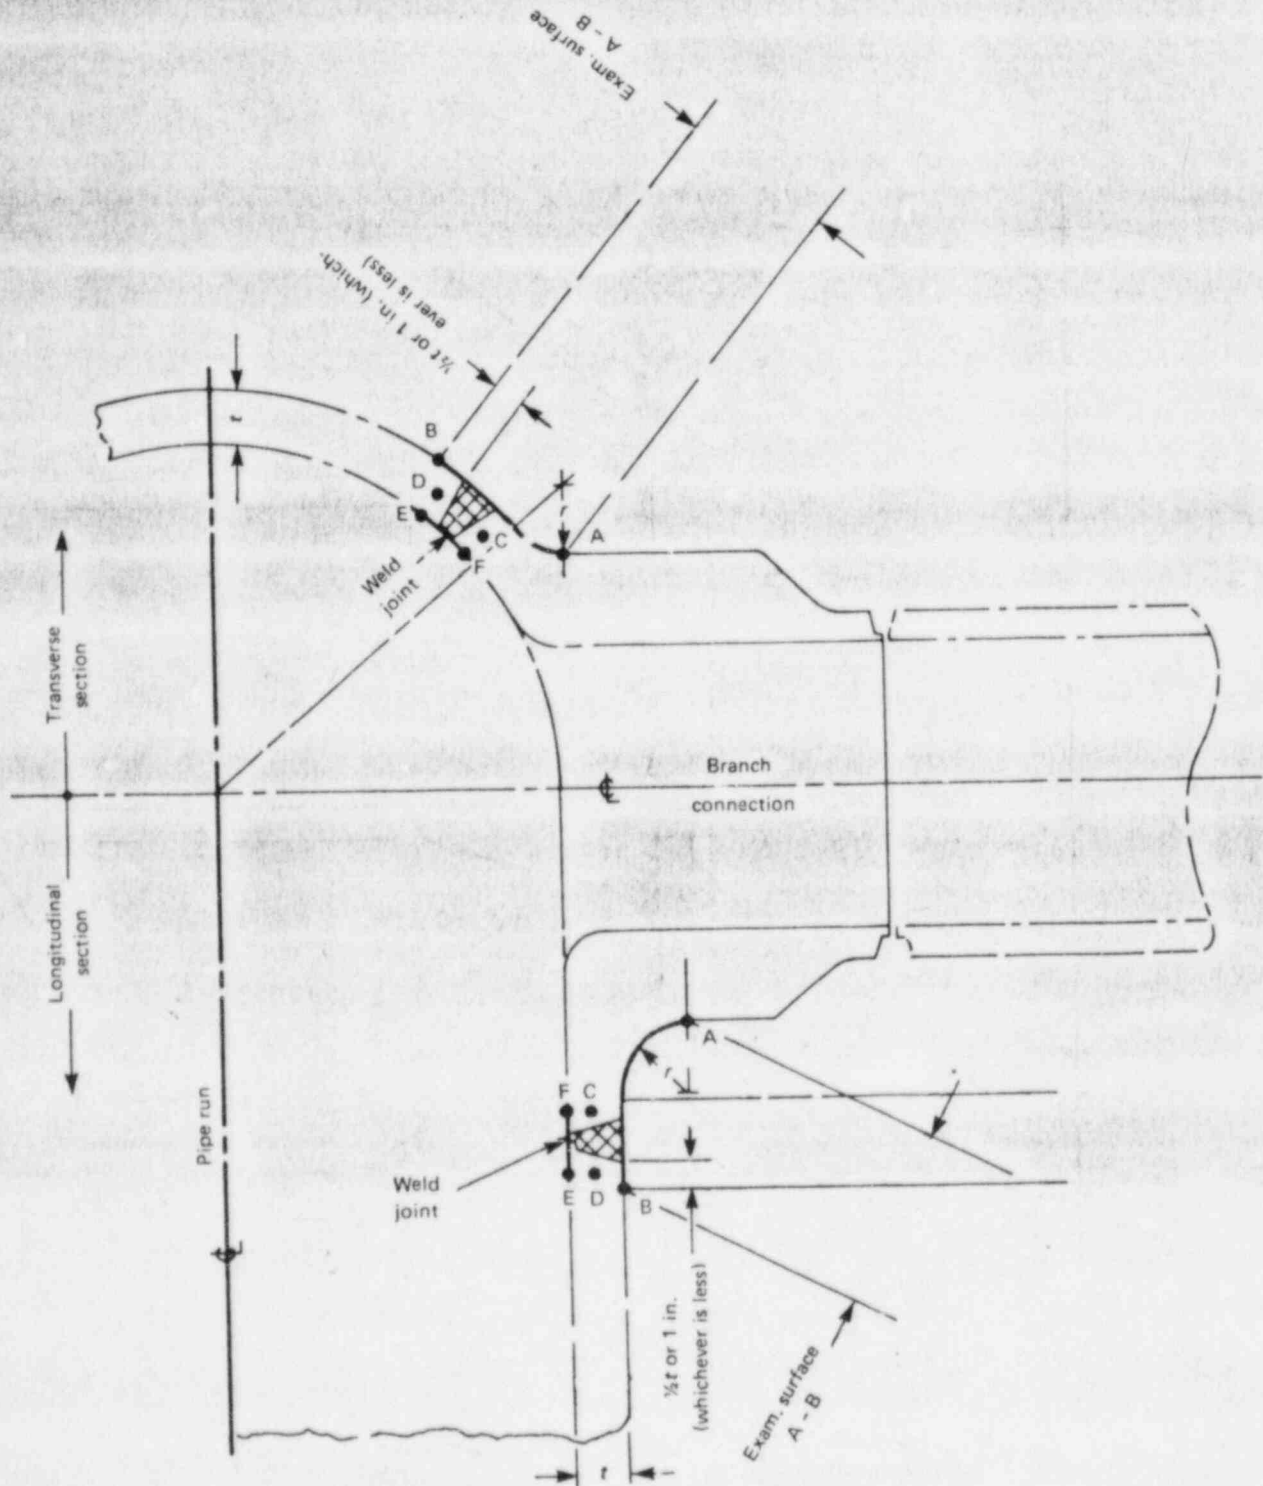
SIMILAR AND DISSIMILAR METAL WELDS IN COMPONENTS AND PIPING
